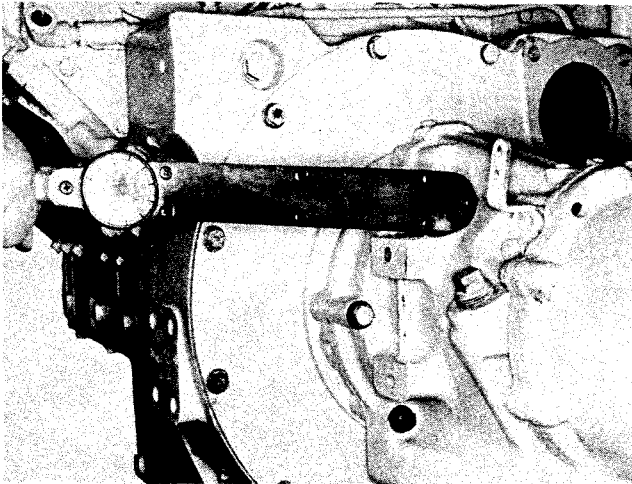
, (V11479). Torquing marine gear mounting capscrews
